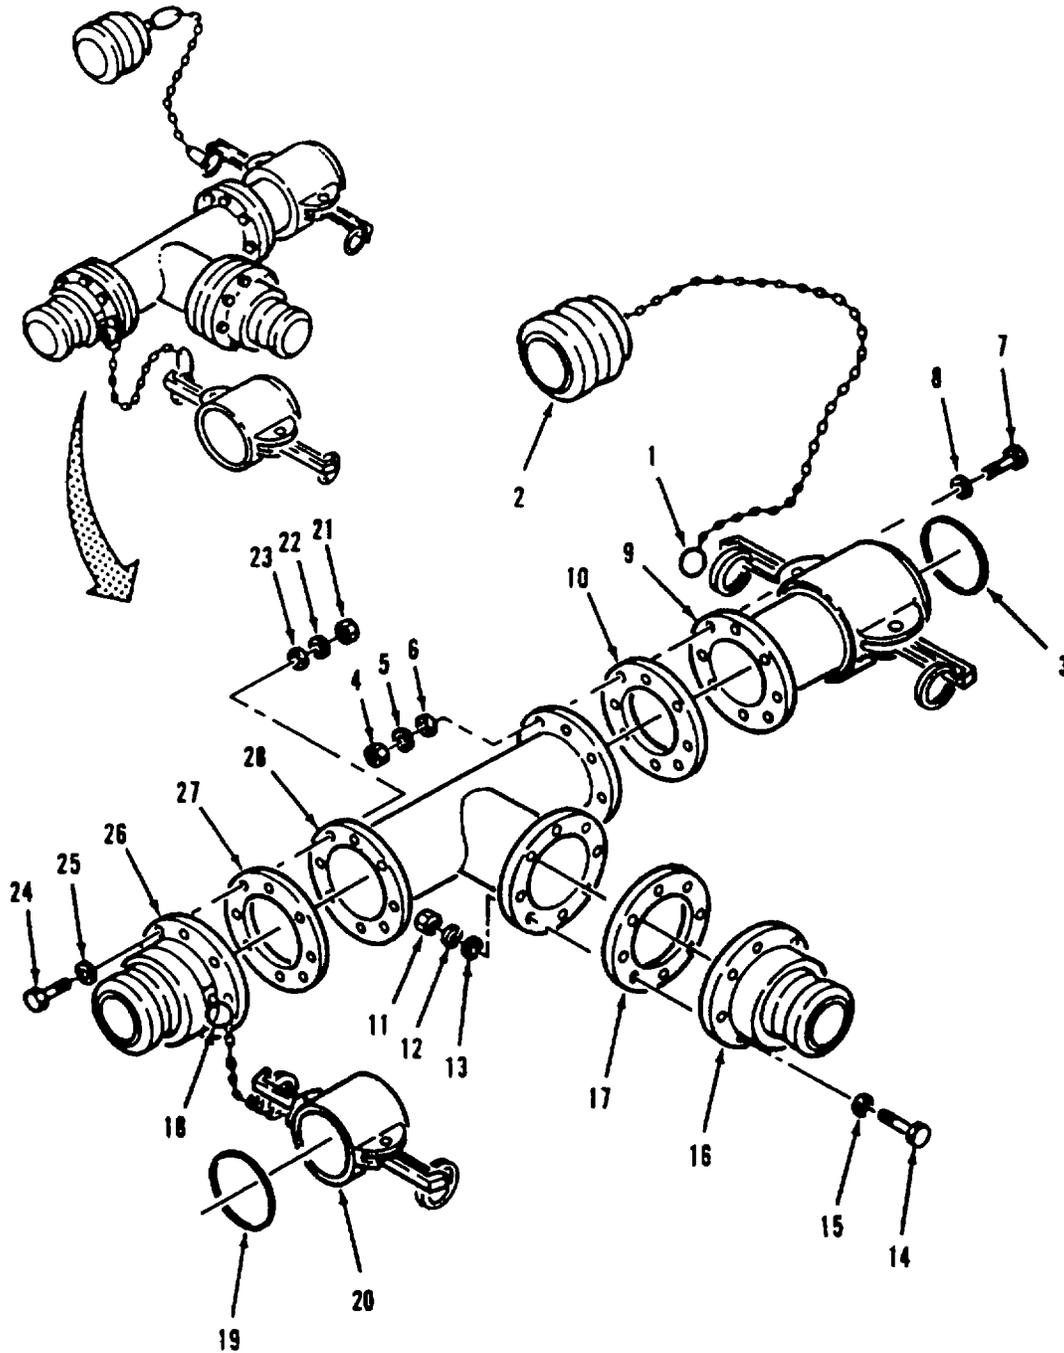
Tee Assembly (9117-Y1) Assembly
